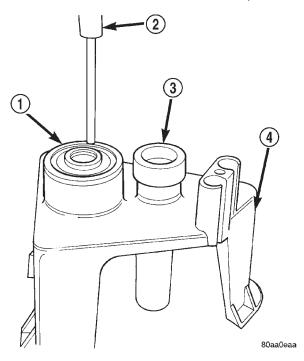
Preparing Assembly Fixture For Geartrain Build-up
